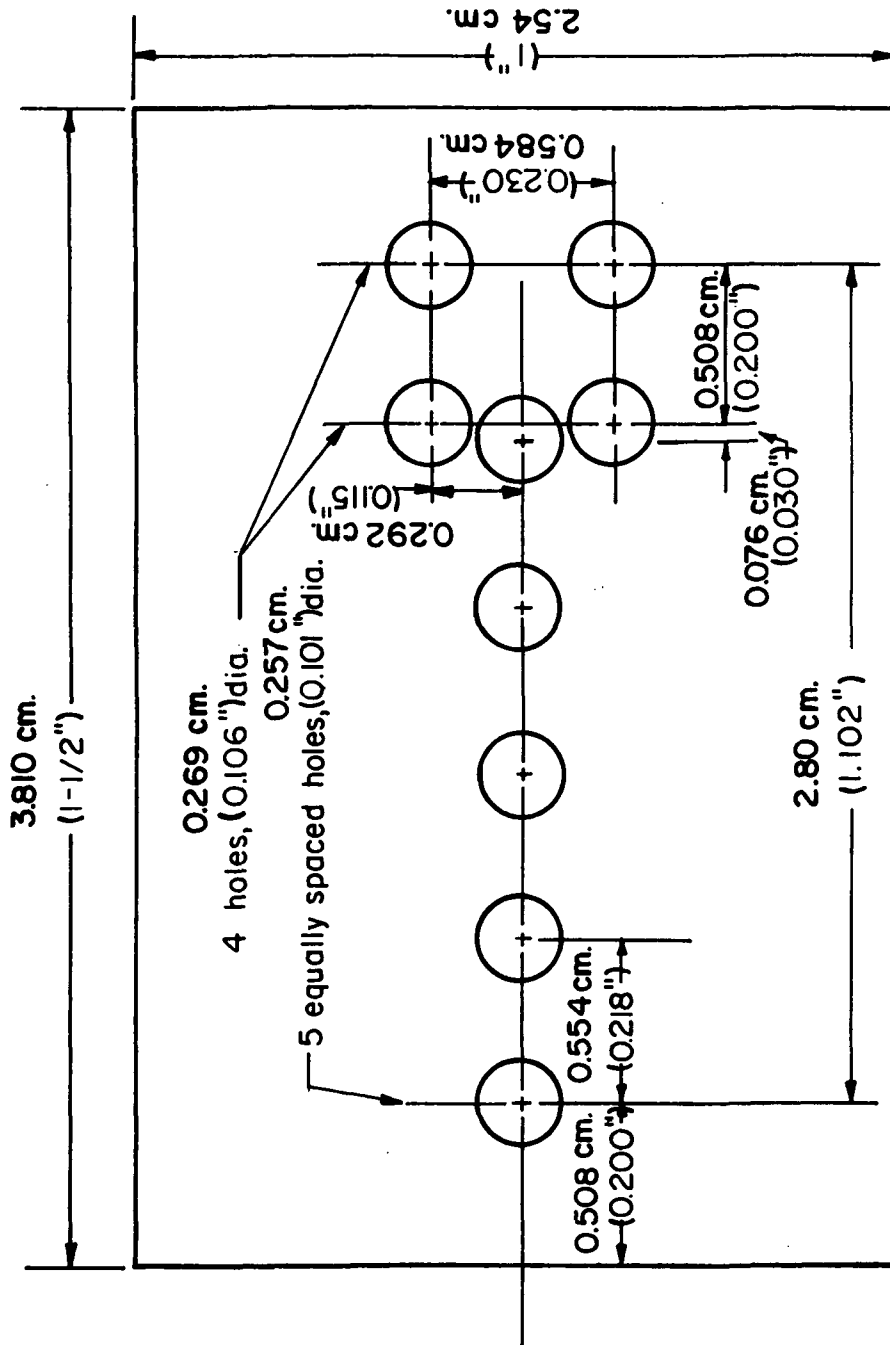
GEOMETRY OF PERFORATED CARRIER TAPE
